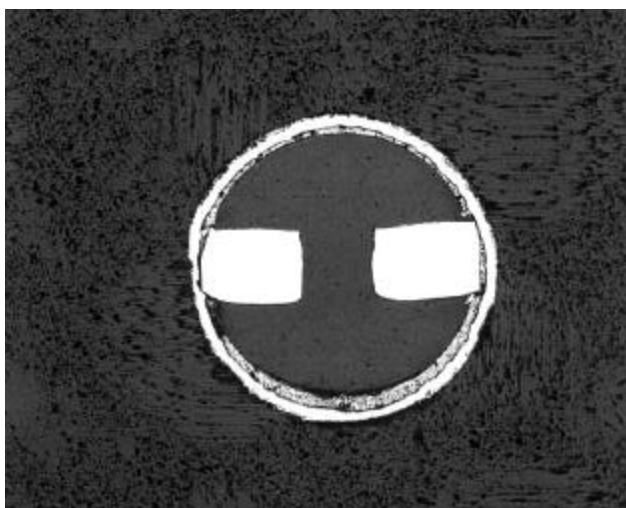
Cross-section of the press fit pin in the middle of a PCB.
